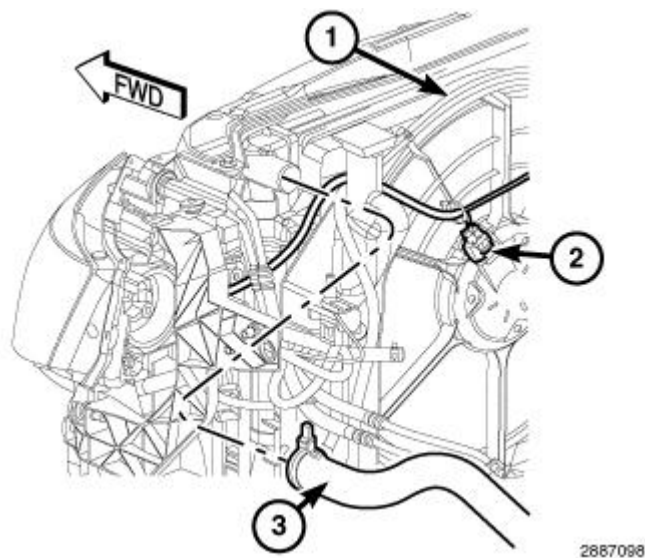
Cooling Fan, Module & Upper Radiator Hose
